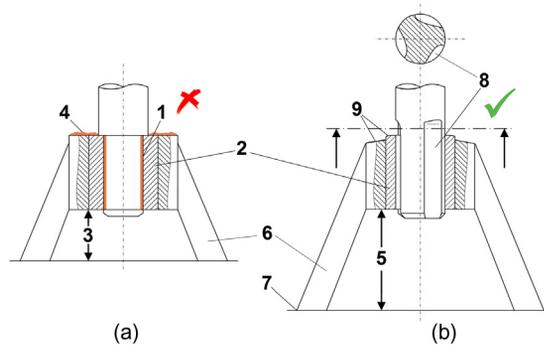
(a) Cleaning may be impeded due to too tight clearance (1) in the foot bearing itself (2), and due to too little clearance between it and the base (3). Horizontal ledges (4) where product may accumulate or where liquids are not allowed to drain must be avoided. (b) The foot bearing is now mounted clear of the bottom of the vessel (5), allowing free flow of product and cleaning solution around it. Bearing pedestal support members (6) should preferably be made of solid construction. Hollow constructions are not recommended, but if used, they shall be of sealed (welded) construction, inspected for integrity. Round legs are preferred over flat members, even if the latter are radiused. The legs should be flush welded in place to the tank bottom (7). All welds must be ground and polished to blend smoothly with the adjacent surfaces. The agitator shaft is provided with grooves (8) in the bearing area to facilitate both lubrication by fluid products and cleaning. Sloped and radiused surfaces (9) reduce the probability of debris getting lodged on the top of the foot bearing and allow for proper drainage of liquids (e.g. cleaning solution) (CFCRA, 1997; Lelieveld et al., 2003; Hauser et al., 2004b; ASME, 2009).
